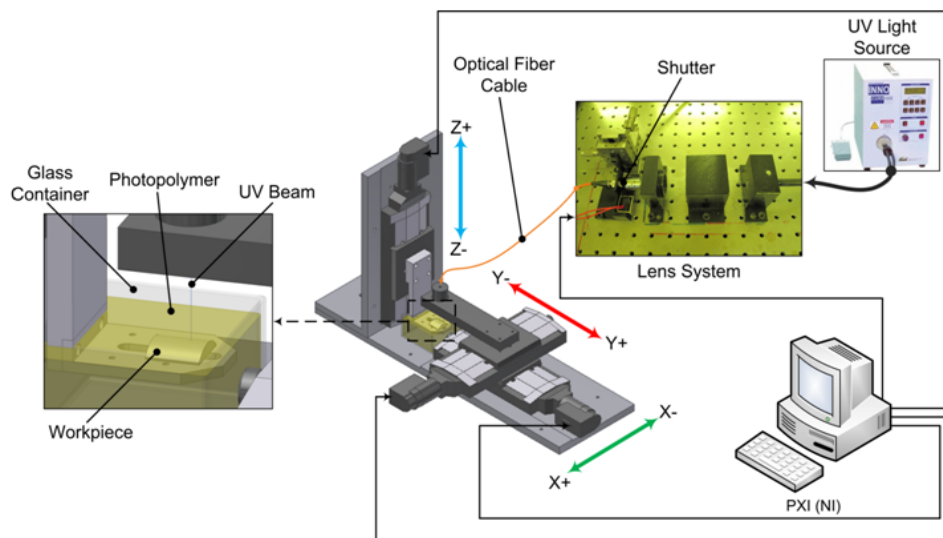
Experimental set-up for fabrication of the SU-8 resist mask onto 3D curved workpiece
